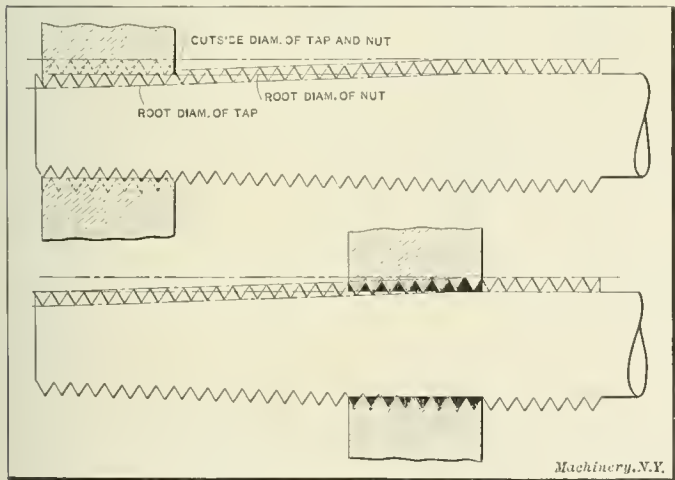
Tap Threaded with Taper in Bottom of Thread so as to require no Additional Chamfer on the Top of the Thread
